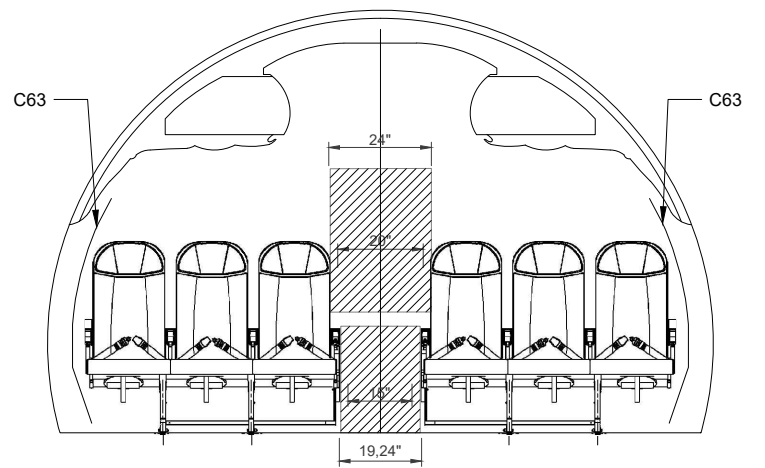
C5. CONSTANT SECTION FRONT VIEW - MINIMUM AISLE WIDTH REQUIREMENTS, AFFECTED ROW 29
